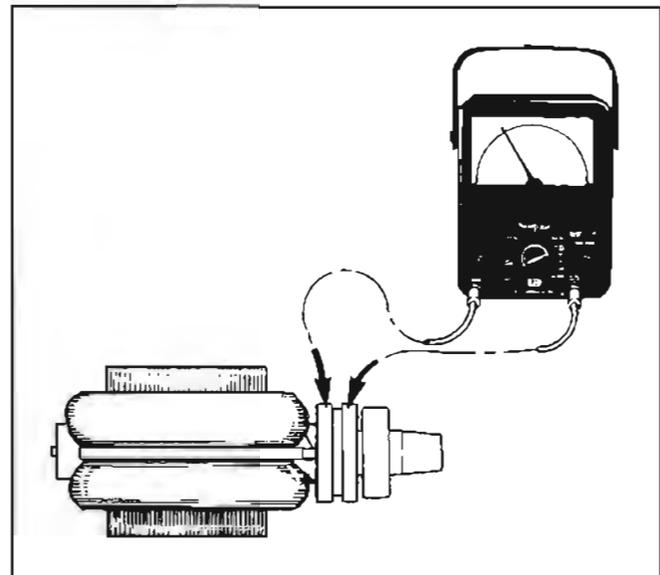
OPEN OR SHORTED ROTOR TEST
